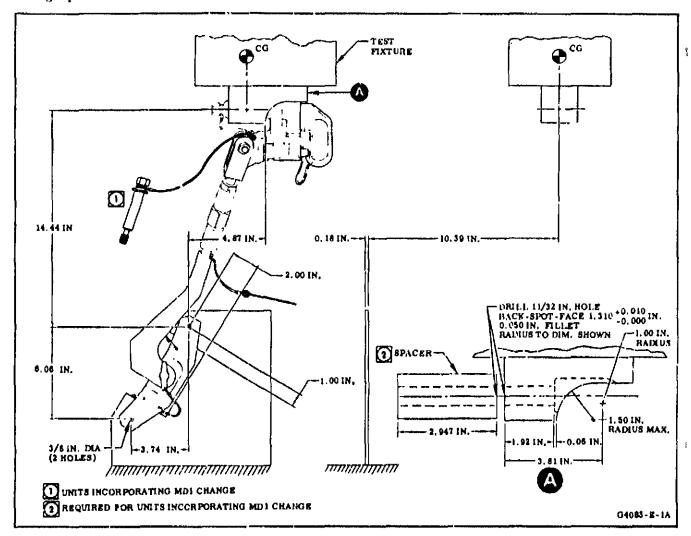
Recommended Proof-Test Setup for Turbopump Support
